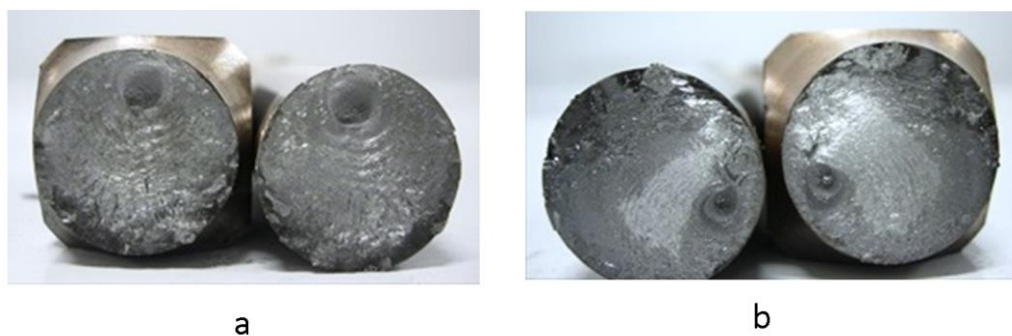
11 Fracture surfaces after torsional fatigue; a) Austempered Specimen, b) Quenching-tempered Specimen
